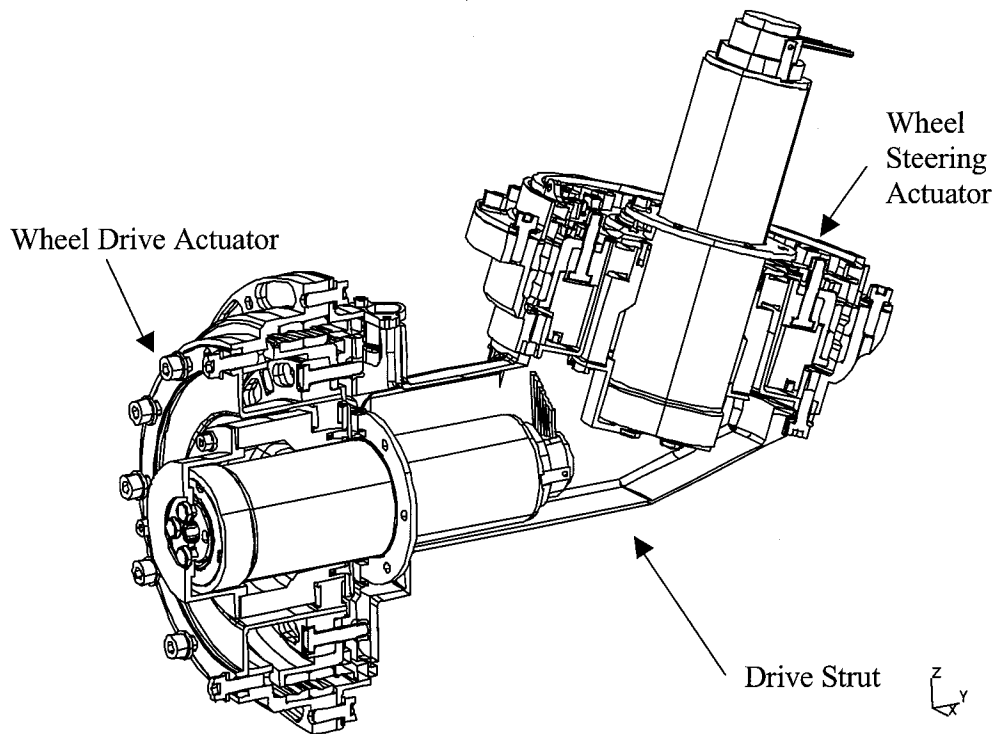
Cross Section of Wheel Assembly (Wheel Removed)
